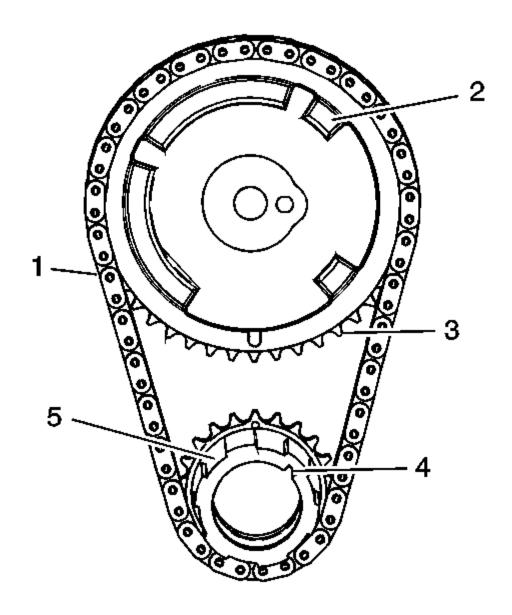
Identifying Timing Chain and Sprockets Inspection Areas Courtesy of GENERAL MOTORS CORP.
